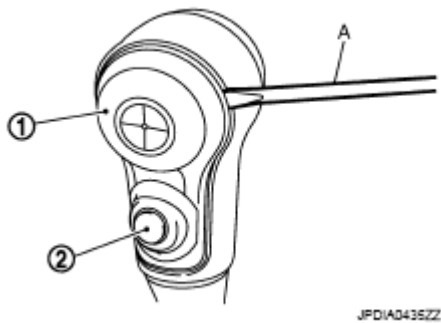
Identifying Knob Cover, Lock Pin And Selector Lever Knob
